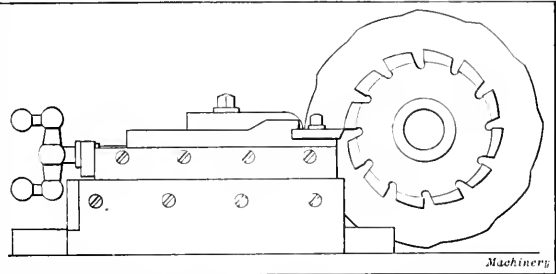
Milling Machine Relieving Attachment for backing off the Teeth
